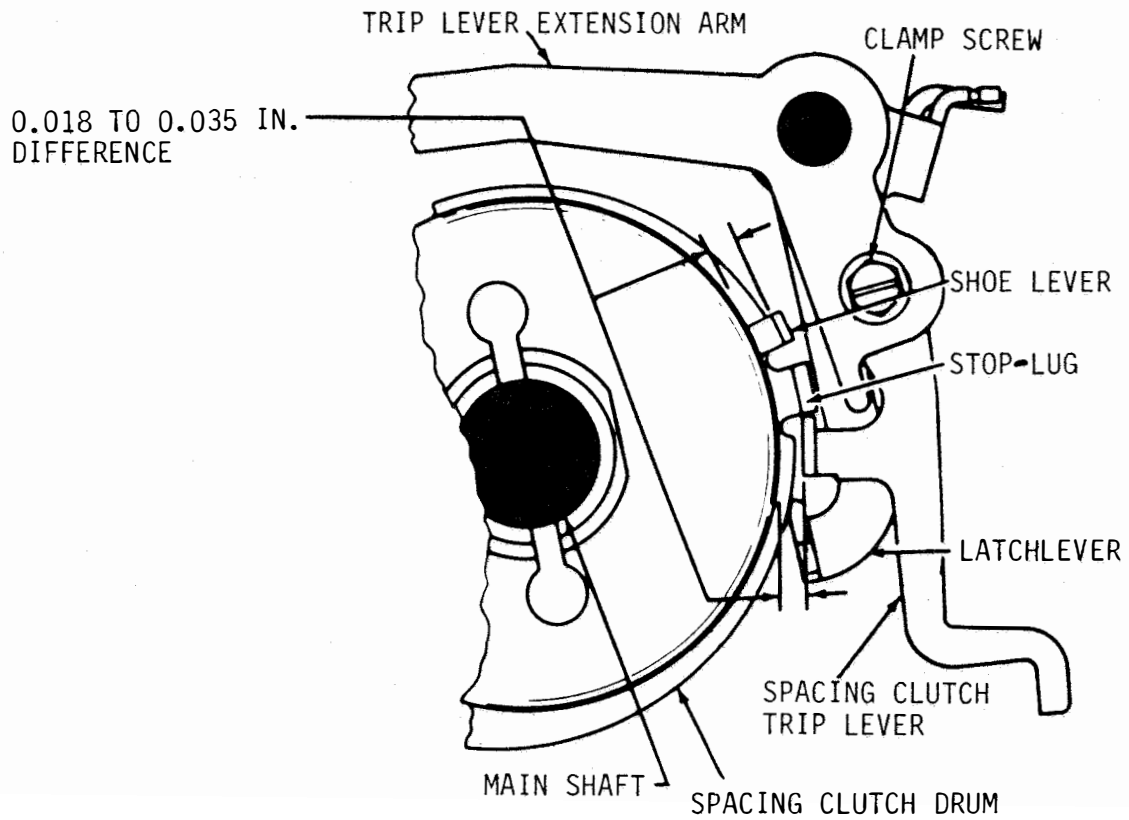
Spacing Clutch Trip Lever, Right Side View
